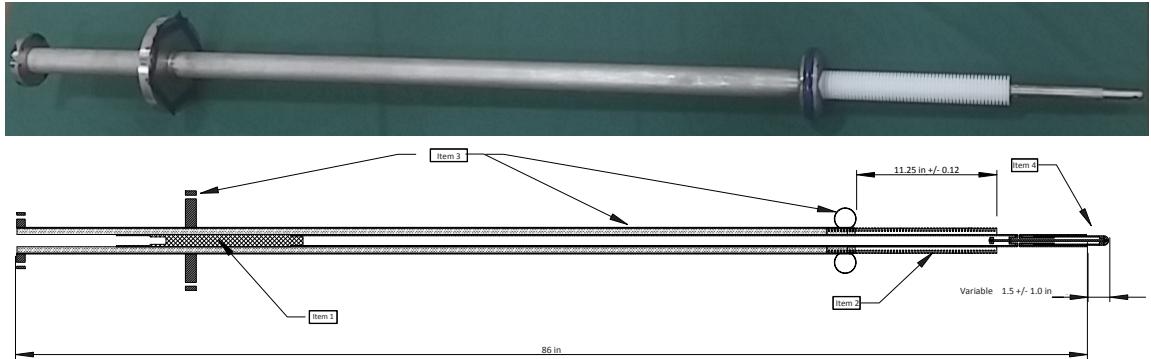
Photograph and drawing of the production HV feedthrough. The spherical probe tip is attached to the end of the inner conductor, on the right side of these figures.
